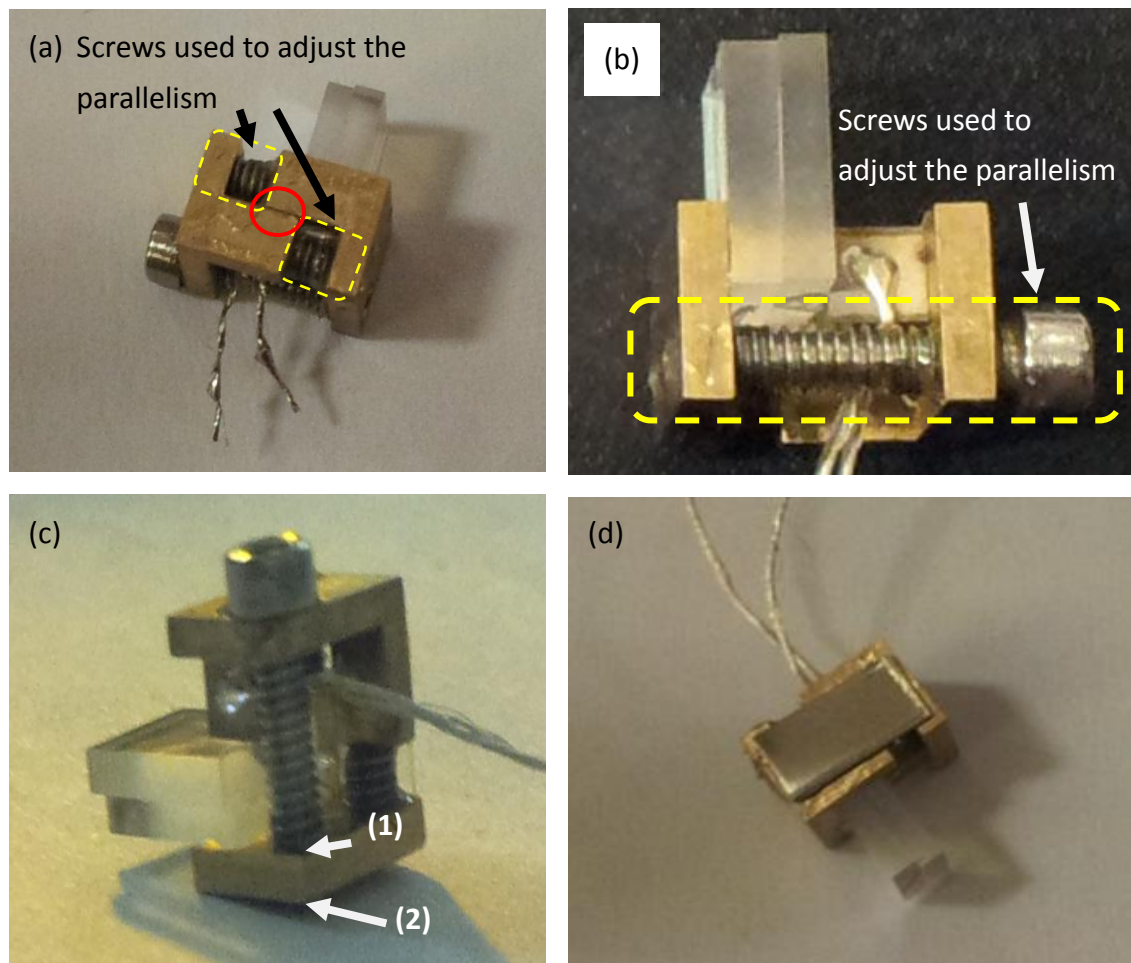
Photos of the 1st design tunable filters. (a) Bottom view; (b) top view; (c) adhesive is added to the position (1) and then diffuses to position (2); (d) gluing a piece of iron thin sheet at the bottom of the tunable filters.
